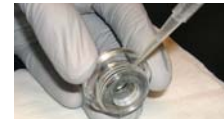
REGE Housing Threads Lubrication with 20 µl Distilled Water
